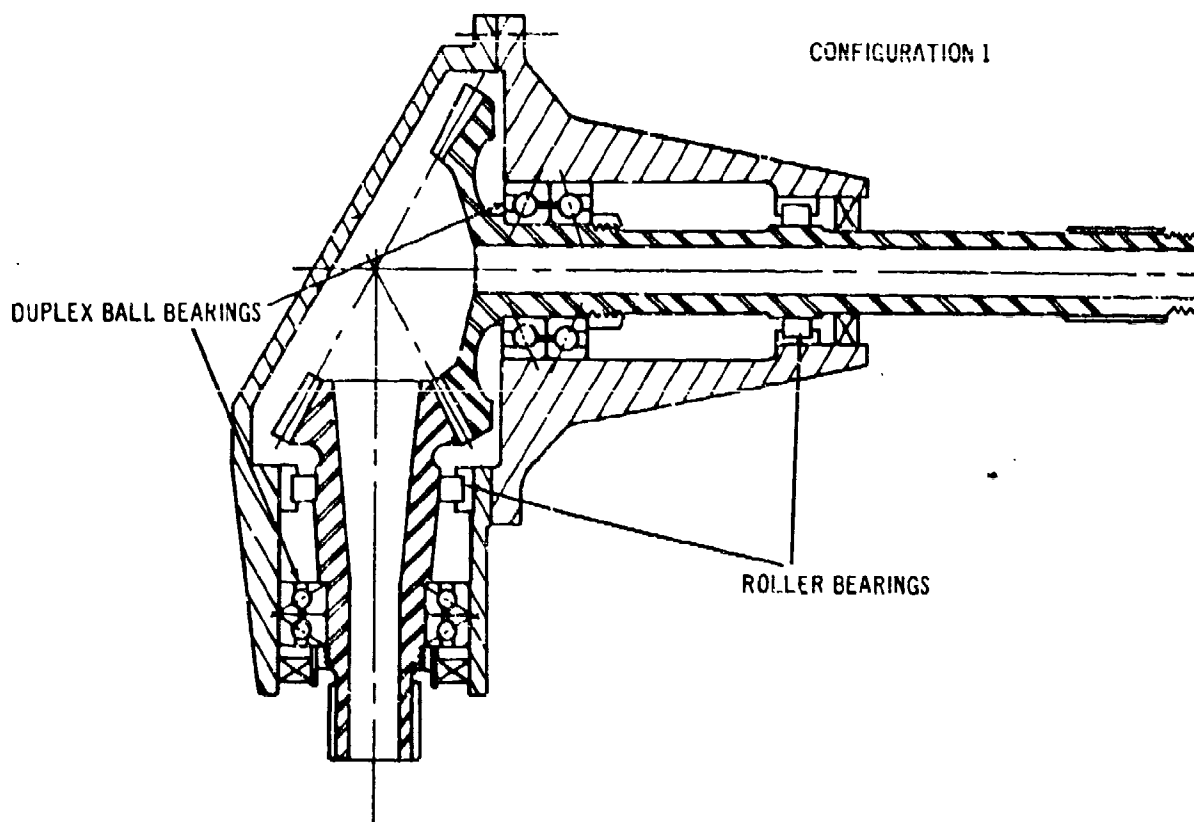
Typical Tail Rotor Gearbox — Vulnerable
